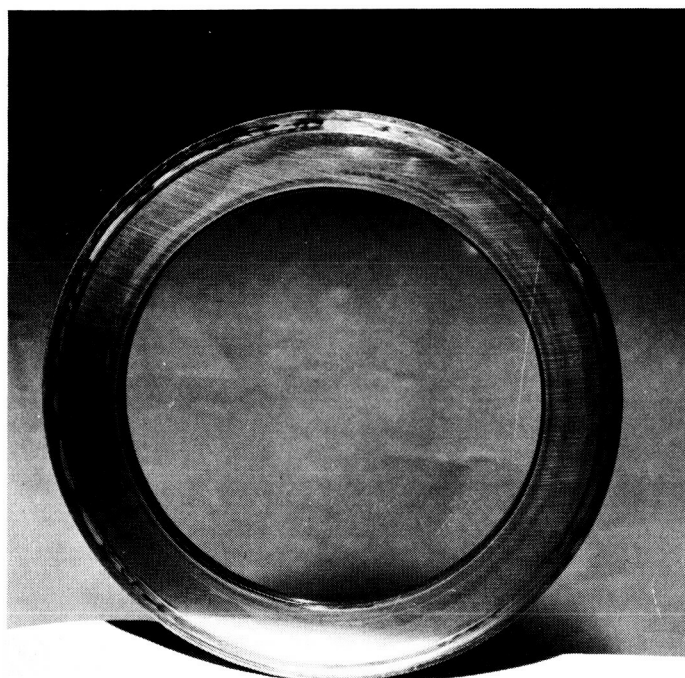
PWA 771 Seal Plate With LC1C Hardface After 9.75 Hours of Simulated Engine Operation Against Carbon Face Seal With Piston Ring Secondary Seal (Build 4) XP-68850
